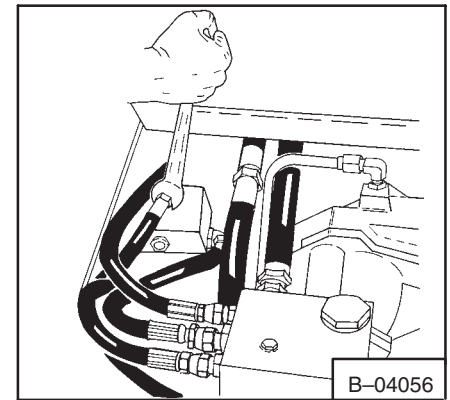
Removing Hydraulic Valve Inlet Hose
